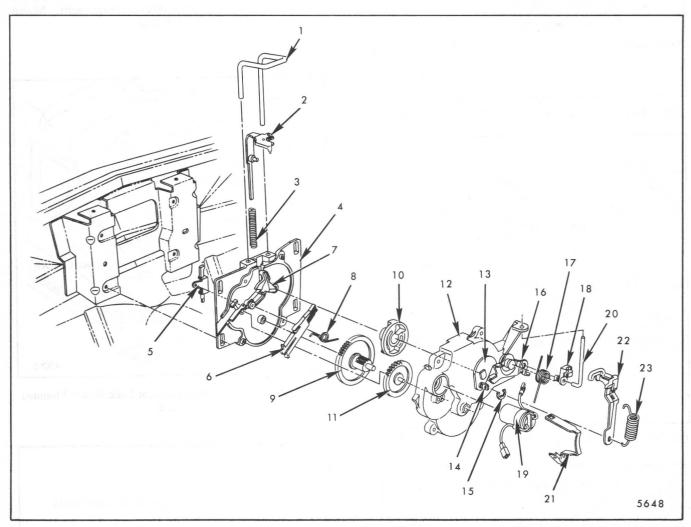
Electric Closing Unit Components - Cadillac Styles
